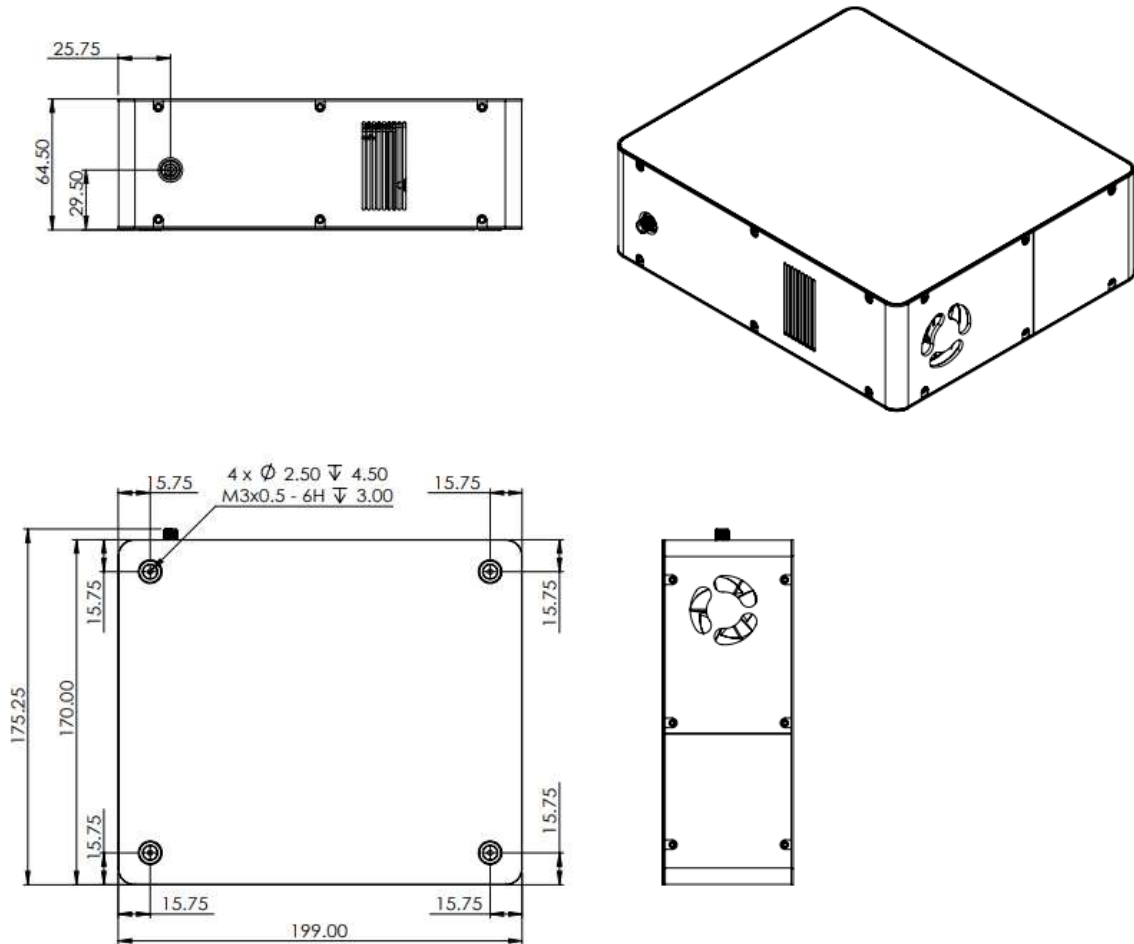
MG & MG-NIR Series Dimensions (SMA905)
